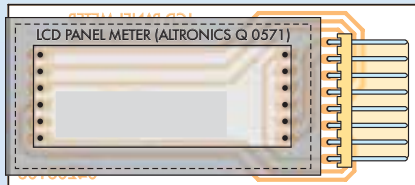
this assembly is only required if you are using the Altronics LCD panel meter. The LED panel meter already comes on its own PC board with a header.
